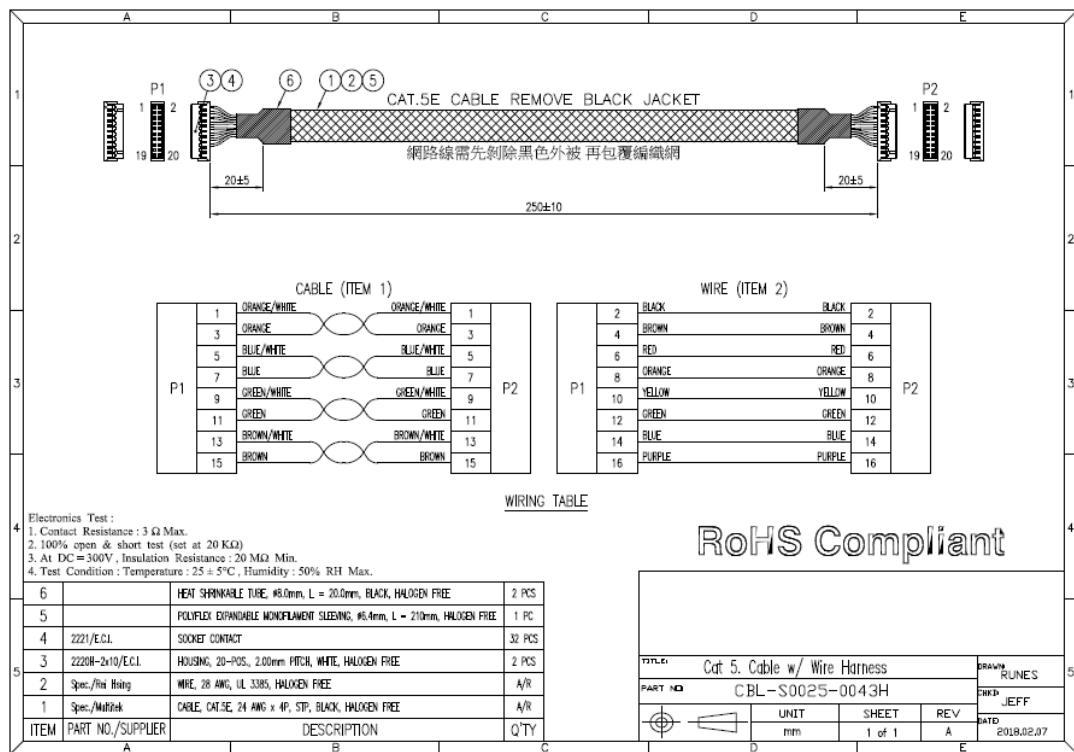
Board to Board LAN Cable Drawing2.6.6. Packing List
